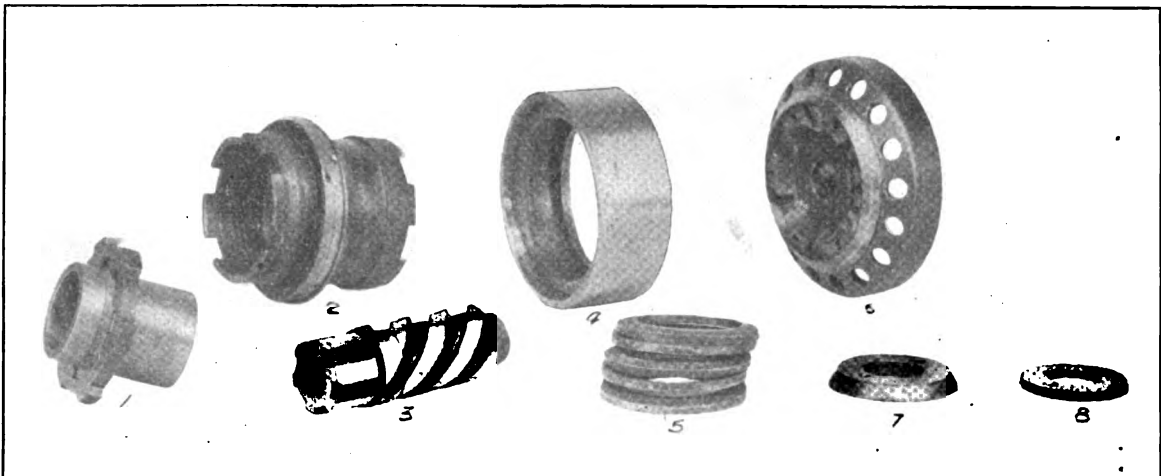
Bijur (rear end) starter driving barrel, overload release and automatic engaging device parts.
